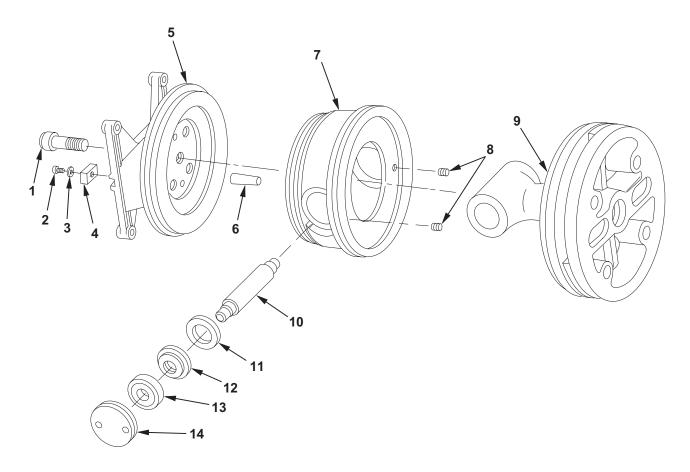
Mounting Adapter, 11727821, and Mechanical Actuator, 11727803.
